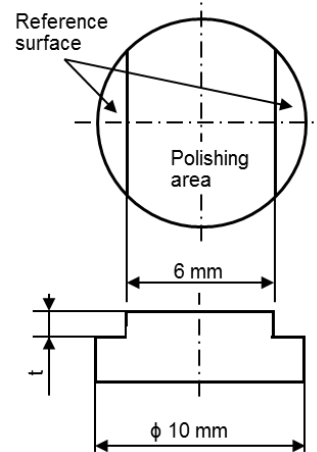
Schematic view of the holding structure for workpieces developed in this study.
